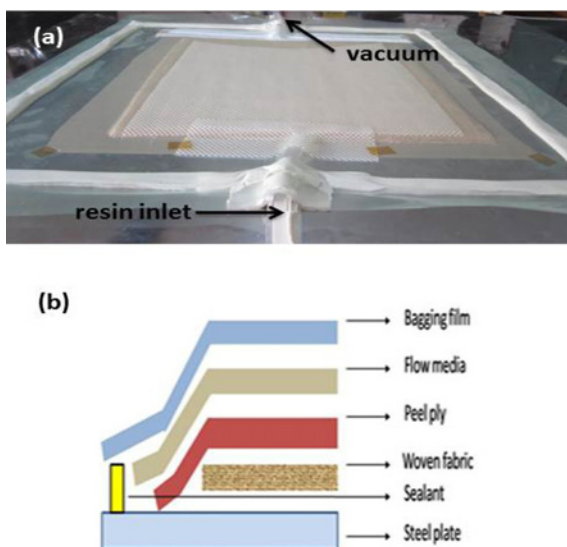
Vacuum assisted resin transfer molding (VARTM). (a) actual set-up with abaca fabric, and (b) schematic representation of the different layers of the VARTM set-up
